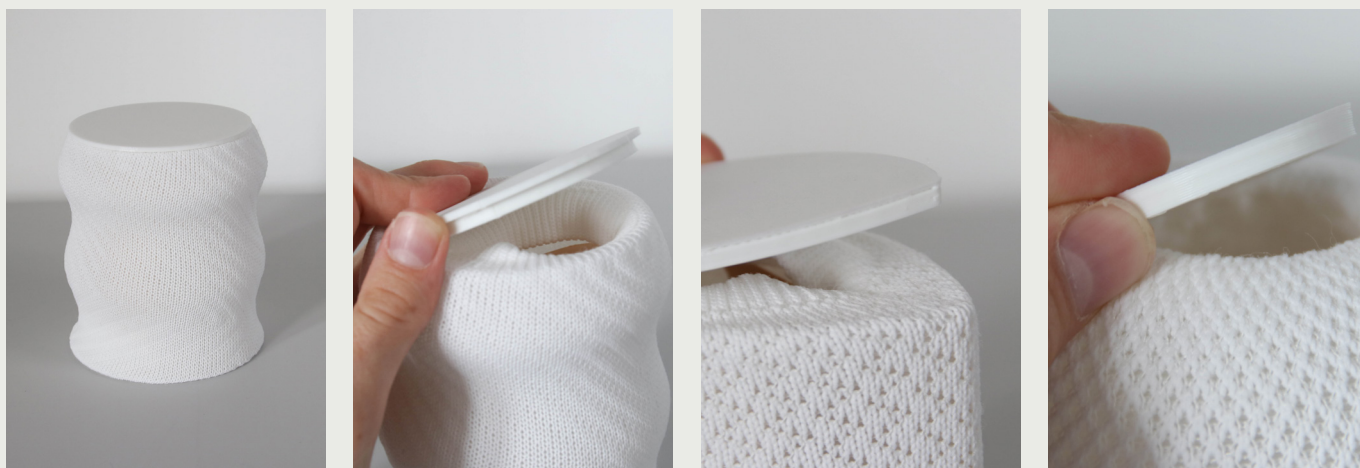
Clamping caps for the wobbly shape, flattened cylinder and spherical surface.
